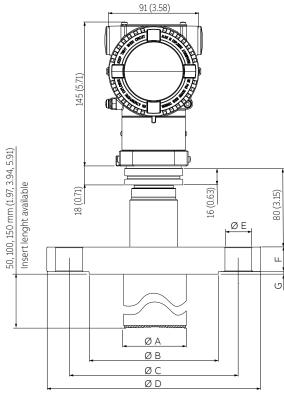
266HRH/266NRH with barrel housing and direct mount seal S26FA/S26FE fixed flange Raised Face ASME and EN 1092/1 smooth and Form B1; S26FE Form E (extension not available). (For dimensions of S26 seals refer to the S26 datasheet)
